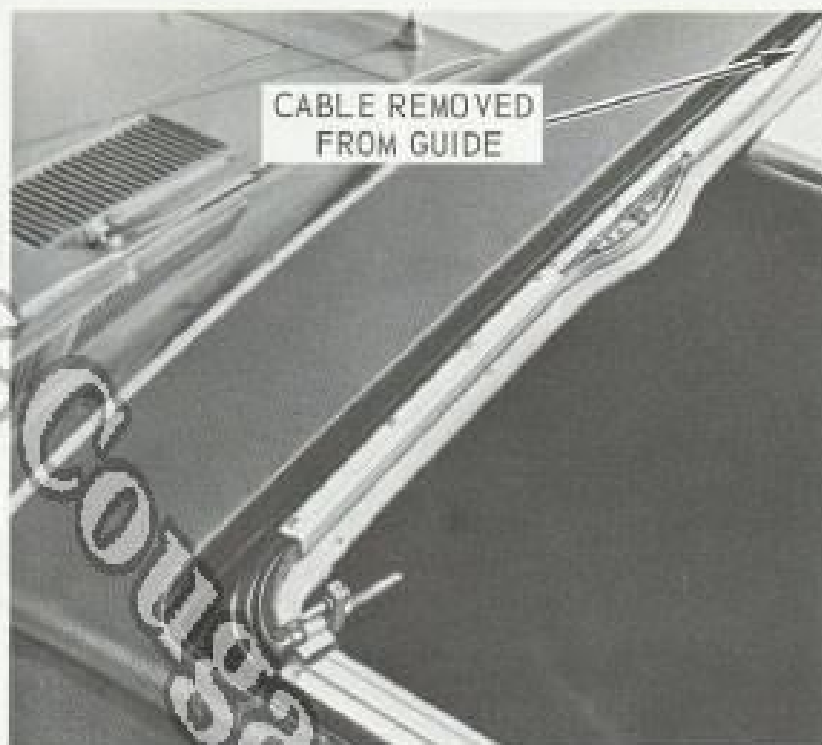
Rear Slide and Cable Pulled to Front Corner of Roof Opening
